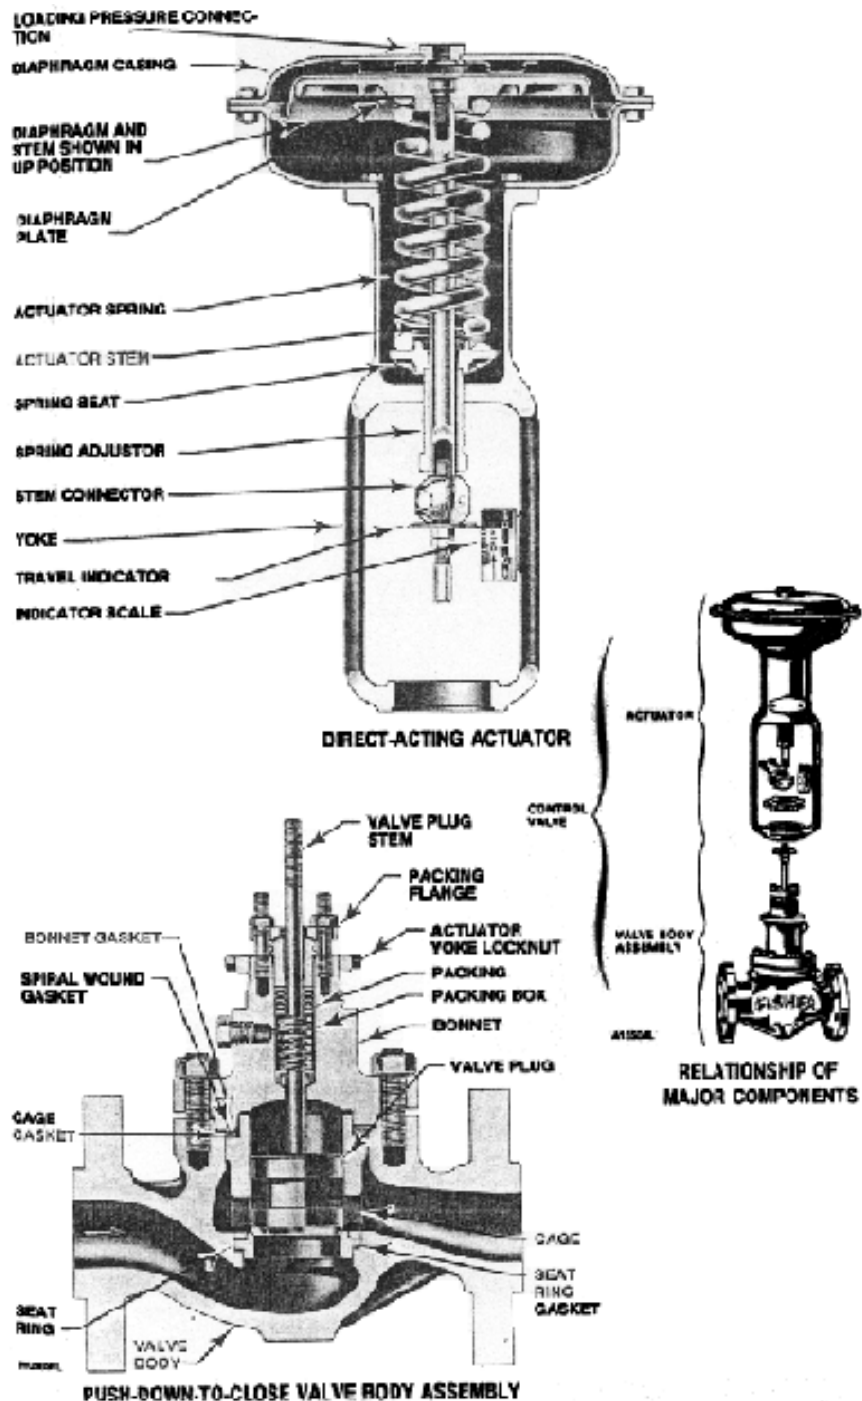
Major Components of Typical Sliding Stem Control Valve Assembly
